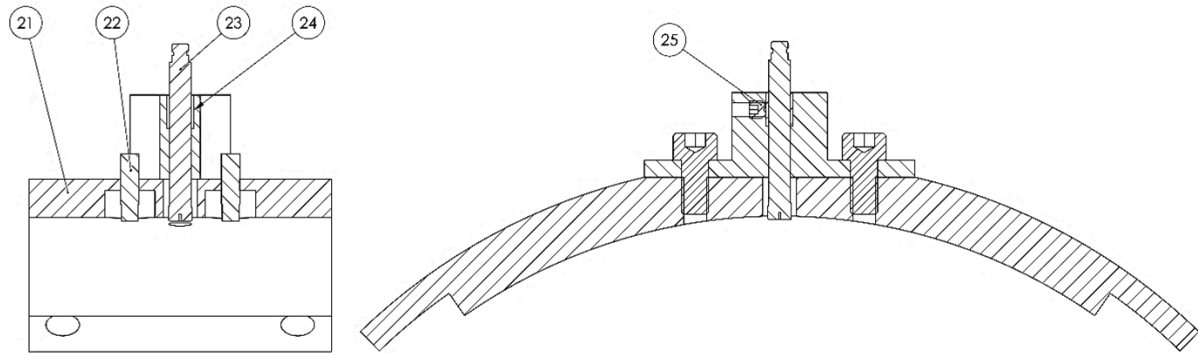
Cross section of sensor mounting plate and attachments
